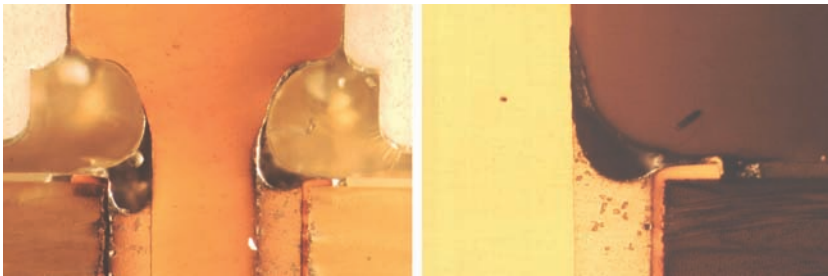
Microsections showing satisfactory solder joints formed with no-clean solder paste during convection reflow soldering in air. The examples both demonstrate 100% solder fill of the plated through-hole, but no topside fillet. These examples exceed the IPC 610E requirements.
